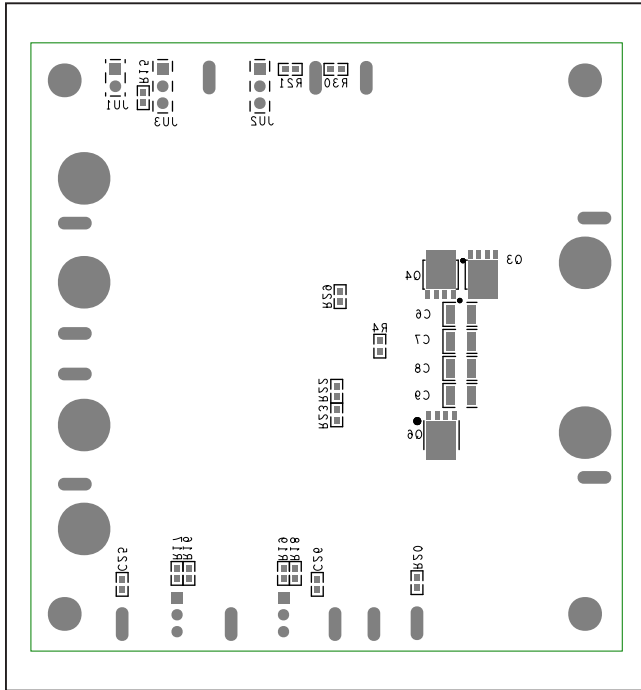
MAX17548 EV Kit Component Placement Guide—Solder Bottom Side
